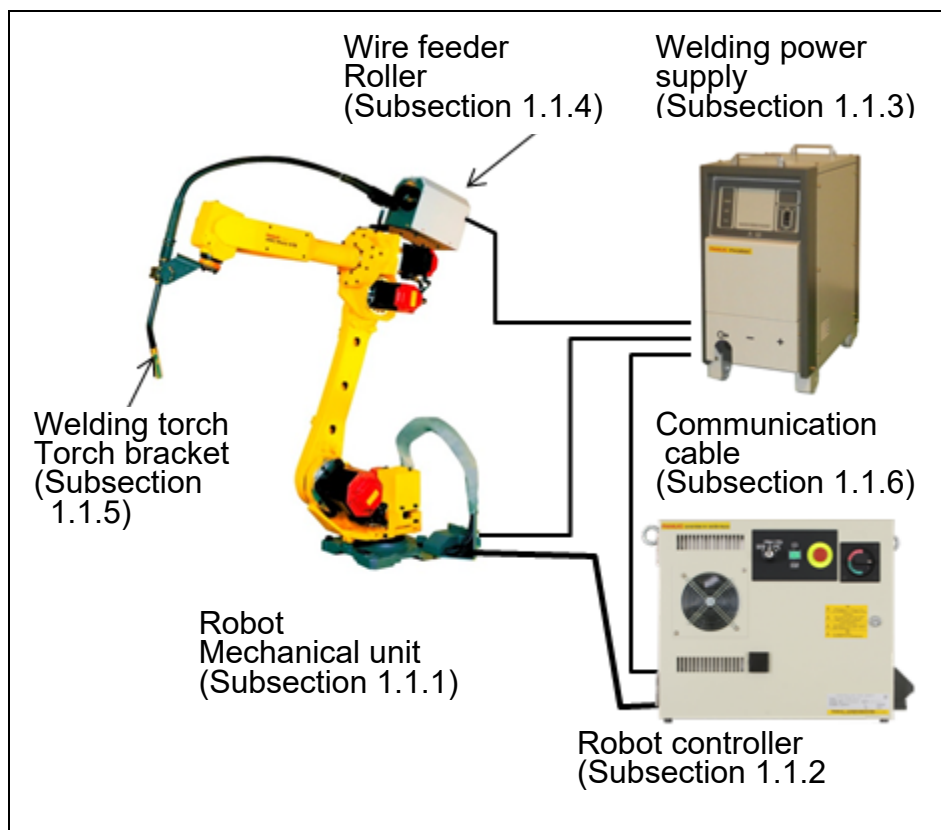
(a) Configuration of robot with welding power supply option
